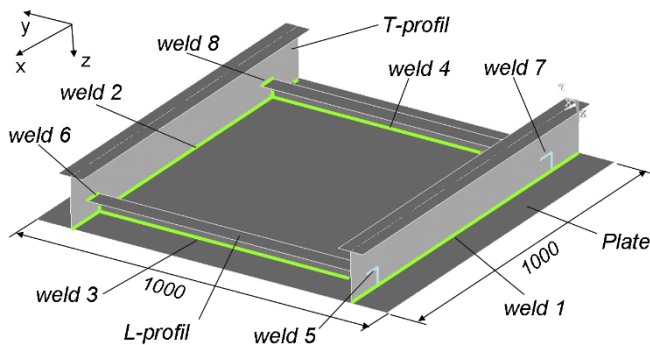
Model of the complex structure with dimensions and welds (upside down)
